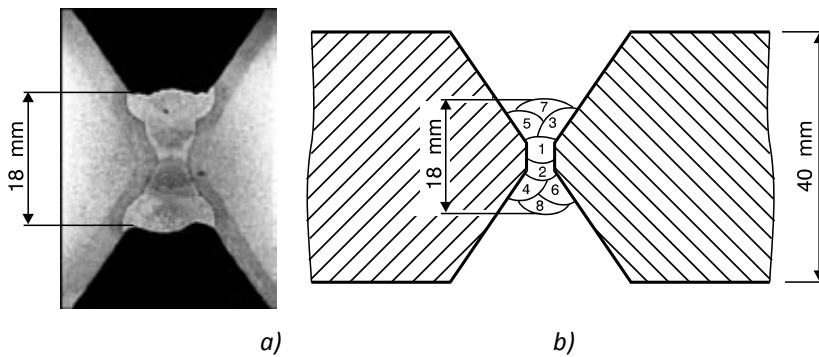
Cross-section of root layer welded with basic covered electrode EVB 47 - ϕ 3.25 a) and welding sequence b)
